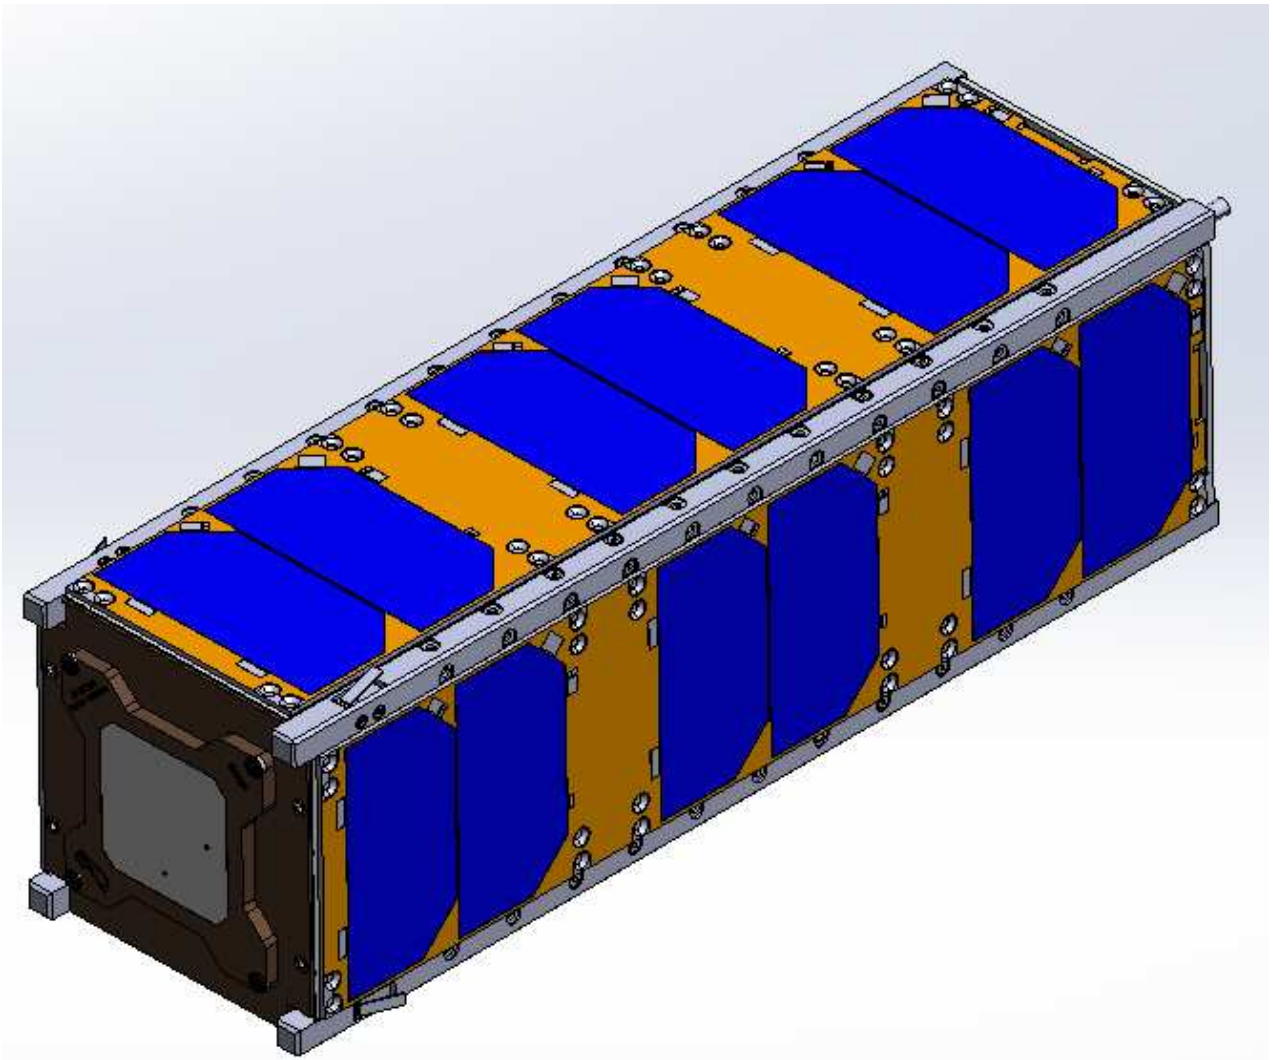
3U common bus in launch configuration without the 3U payload installed, showing the external mechanical configuration and integration-ready payload cavity. Rails and external envelope are consistent with CubeSat form-factor requirements. Multi-layer insulation (MLI) is omitted for clarity.
